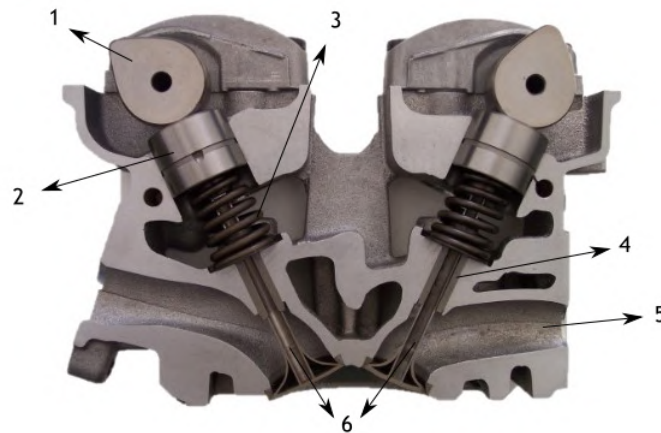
OHC engine adapted from [34]. (1) cam; (2) cam follower; (3) valve spring; (4) valve guide; (5) port and (6) poppet valves.
